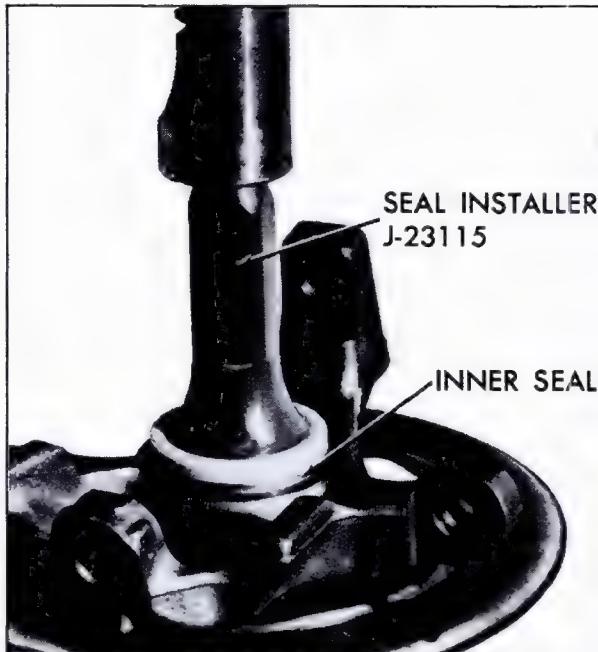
Installing Inner Seal In Knuckle race of bearings before installing hub in knuckle and bearing assembly.
